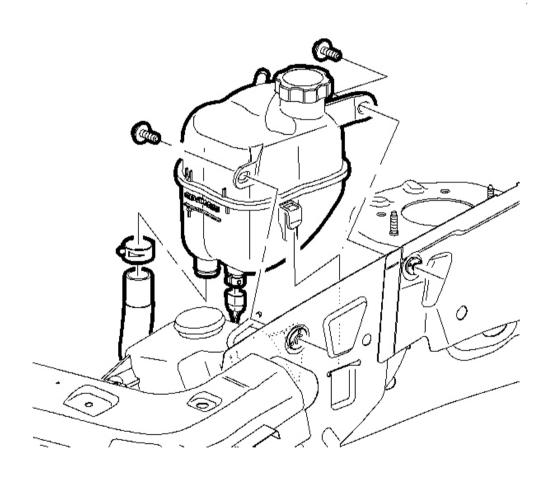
View Of Surge Tank Hose Courtesy of GENERAL MOTORS CORP.
